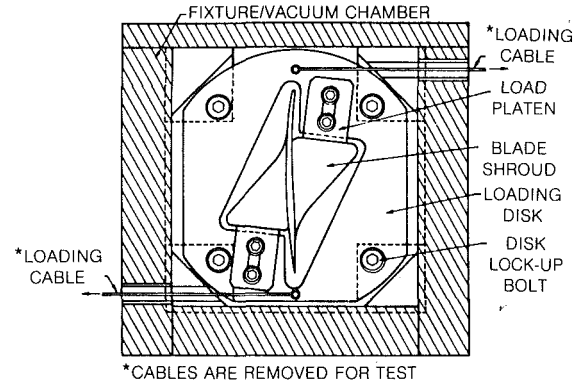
Shroud loading device for investigation of fan blade shroud damping mechanism
